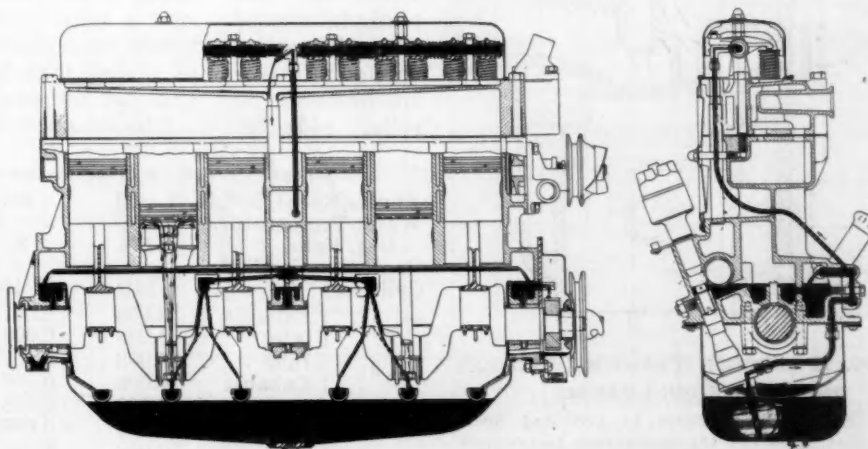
LUBRICATION SYSTEM OF CHEVROLET ENGINE
